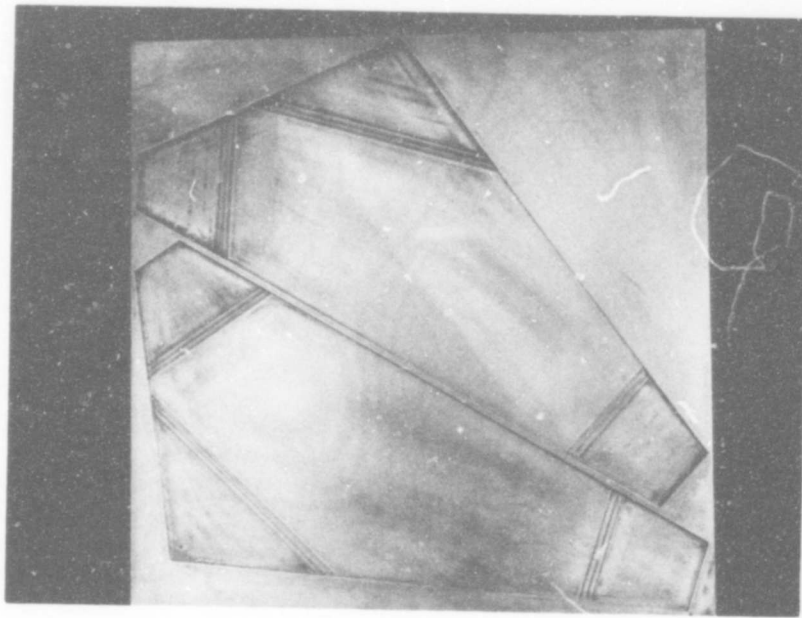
Aluminum Matched Metal Molds Used To Fabricate Face Sheets.
